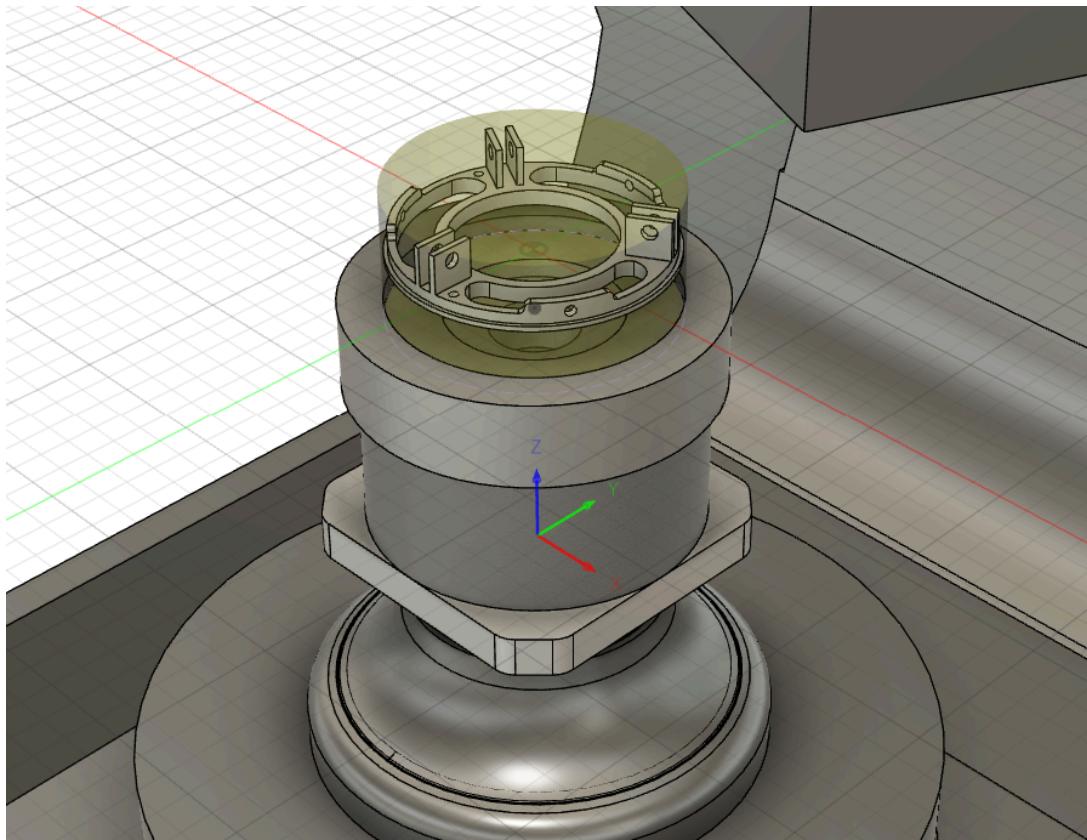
Thrust and Centering Plates Operation 1 Setup
